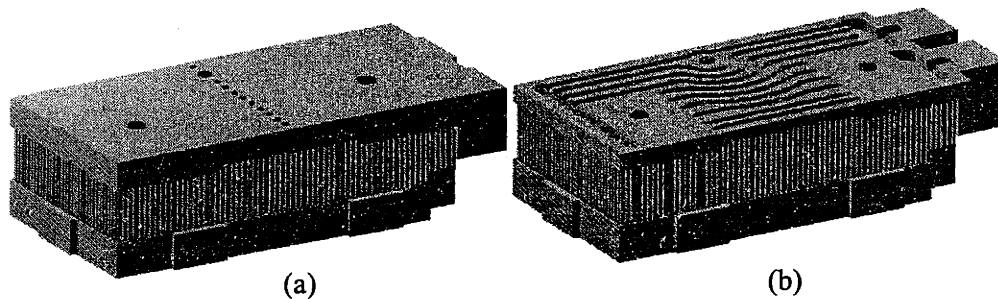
(a) solid model of the cavity insert for rapid thermal cycling test. (b) cutaway view of the cavity insert showing the conformal channels inside
